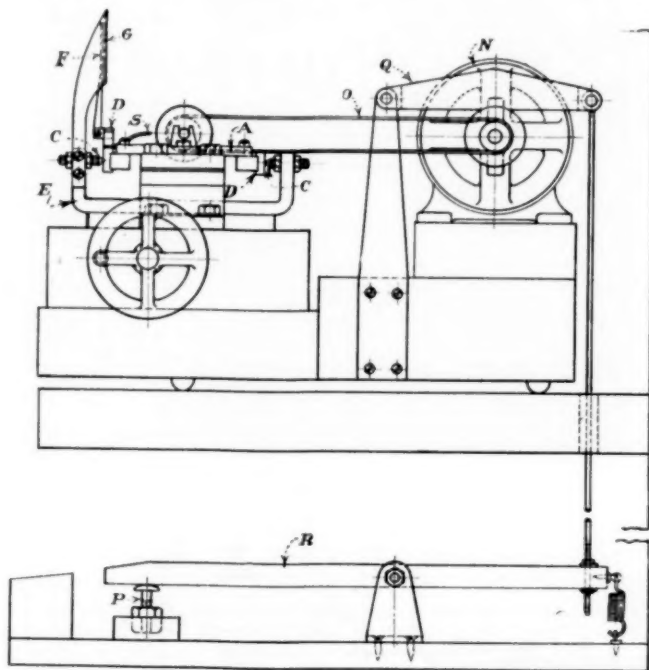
END VIEW OF BALANCING MACHINE WITH MOVABLE FULCRUM
